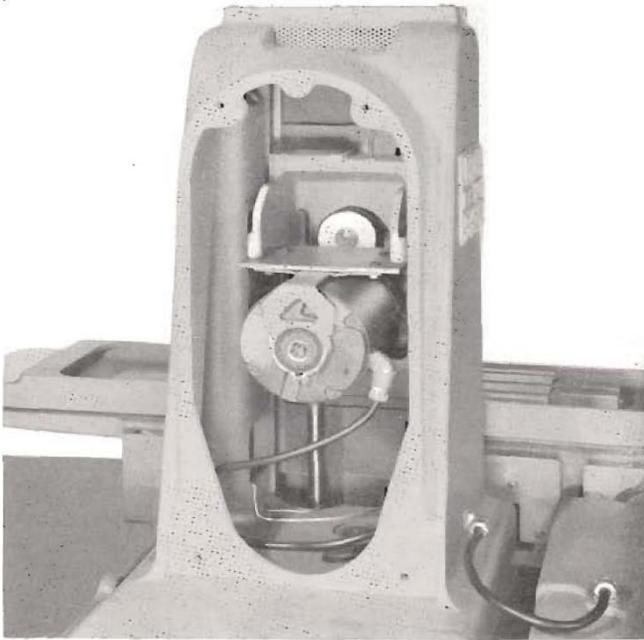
Rear View of Upright Compartment Showing Motor With Oriflex Drive.
